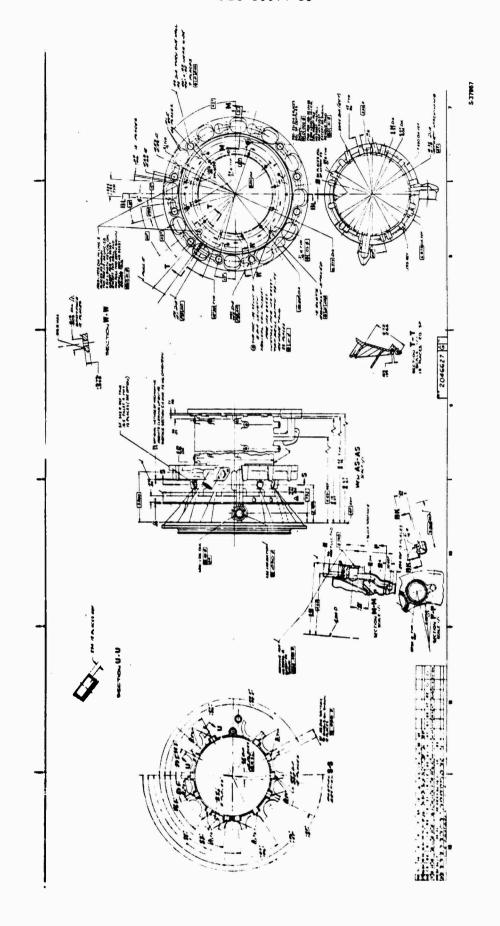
Generator Stator Housing Assembly, 2046627 (Sheet 1 of 2)
